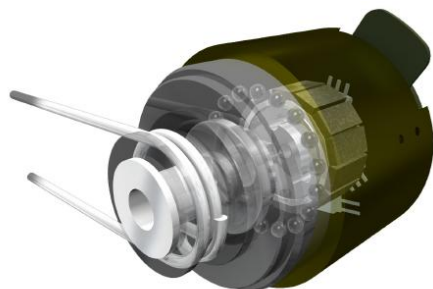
Drive unit with ILM 25 and harmonic drive gearing
